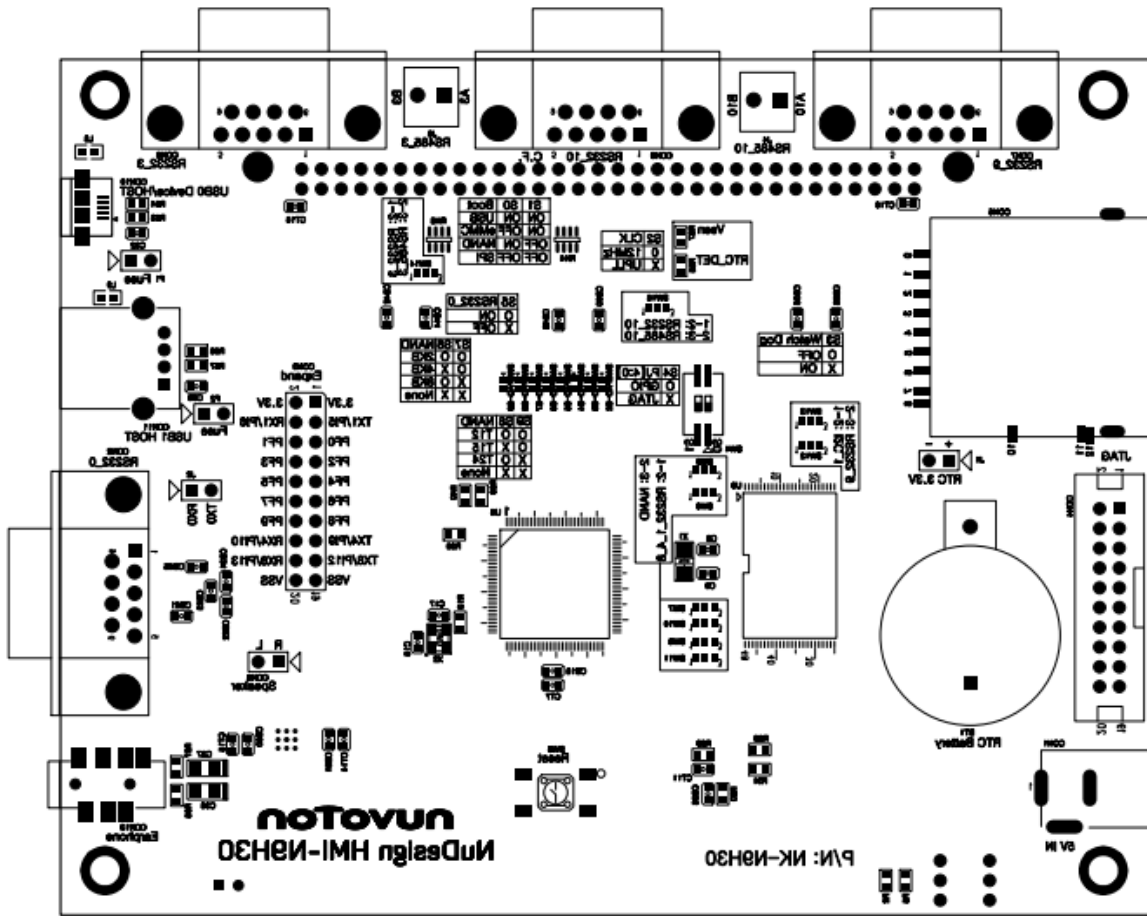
NuDesign-HMI-N9H30 Back PCB Placement
